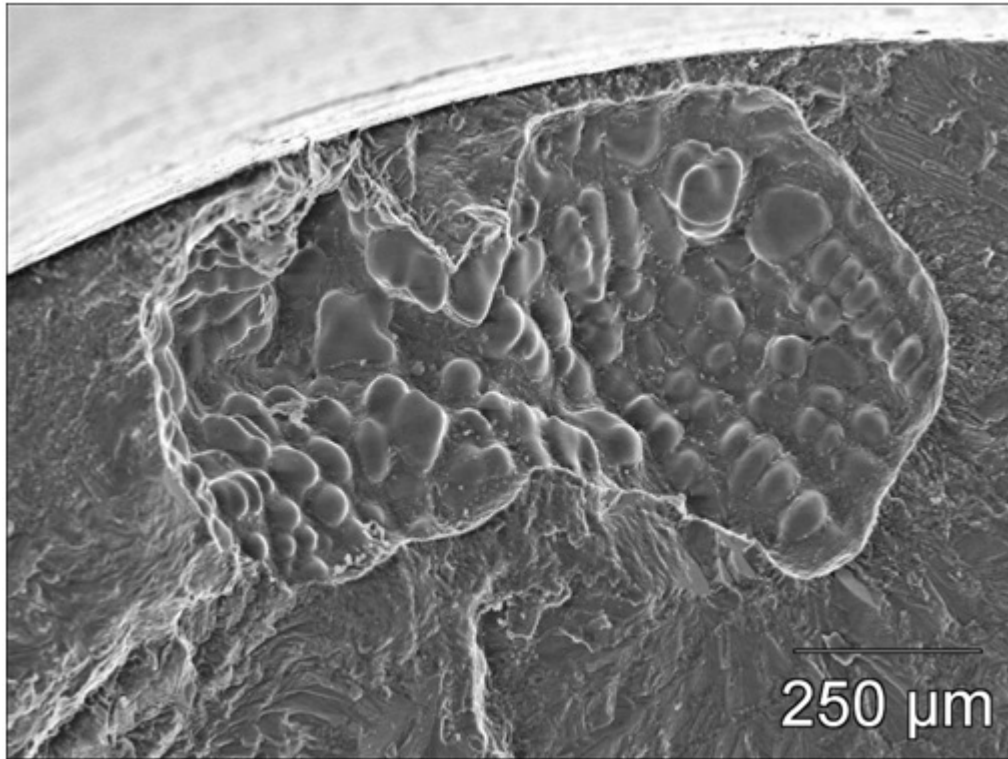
Fracture surface of machined 356-T7 fatigue specimen ($R=-1$, minimum load -2051 N, maximum load 2051 N, cycles to failure 1,064,794, defect area 0.18 mm²).
